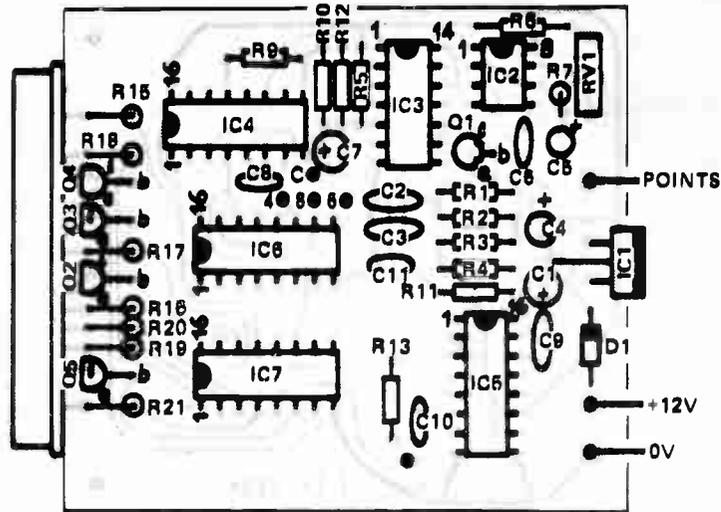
The component overlay for the board. The board is double sided although only the lower surface is shown here. Note the link between the two surfaces of the board near C10.
